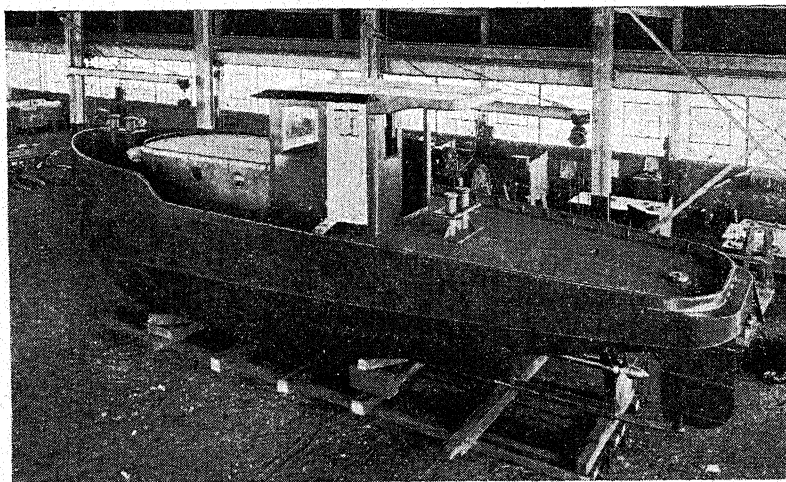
Arc welded towboat "Termo" completed.
